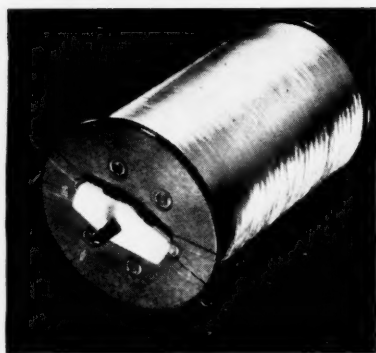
Molded One-Piece Nylon Flyer Block Used in Textile Machinery Travels as Fast as 15,000 R.P.M. without Lubrication. Attached to Spindle in Spinning Operation. Block Holds Wires Providing Necessary Tension to the Yarn
